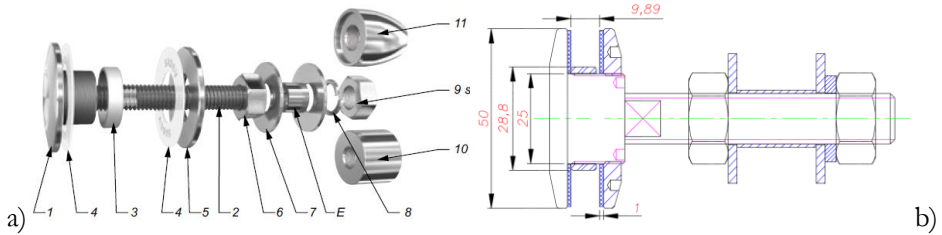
A) COMPONENTS OF A RAISED HEAD BOLTED POINT FIXING AND B) THE DIMENSIONS (SADEV 2015) (ALL DIMENSIONS ARE IN MM).
